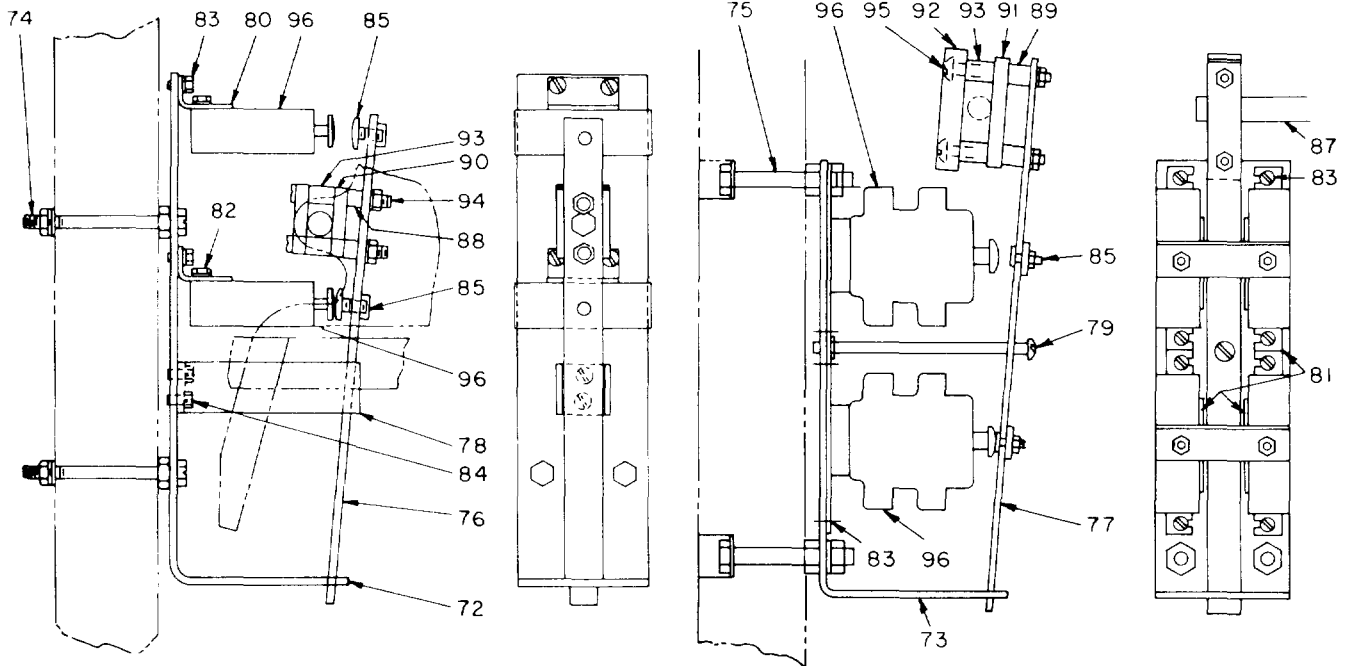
Mounting parts for interlocks, letters B, C, D, or BB
